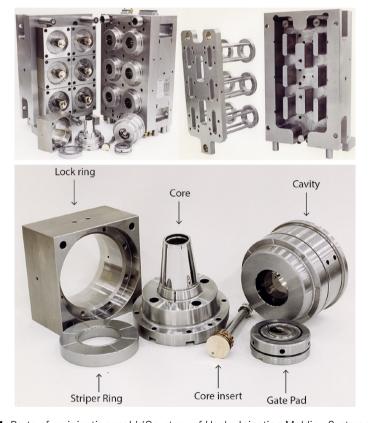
Parts of an injection mold (Courtesy of Husky Injection Molding Systems Ltd.)
